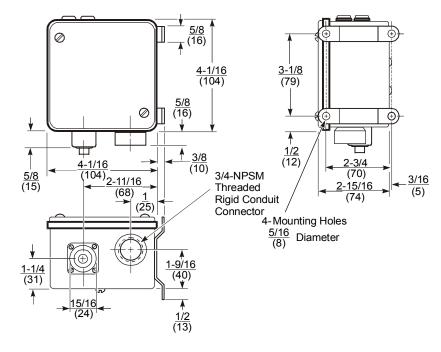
Dimensions for High Pressure Controls with NEMA 3R Enclosure, in. (mm)
